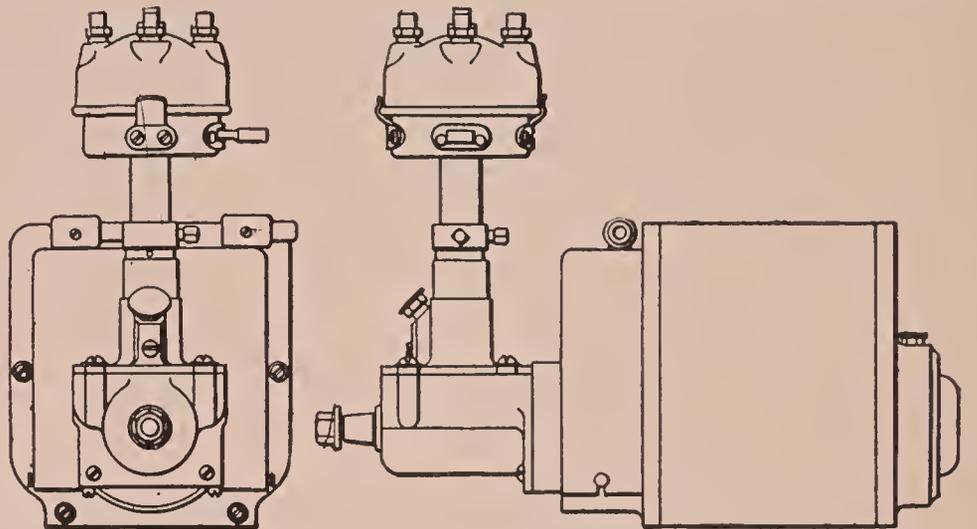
The Current Generator of the System Shown in Fig. 137, Showing the Distributor Arrangement on the Front End of the Housing.
